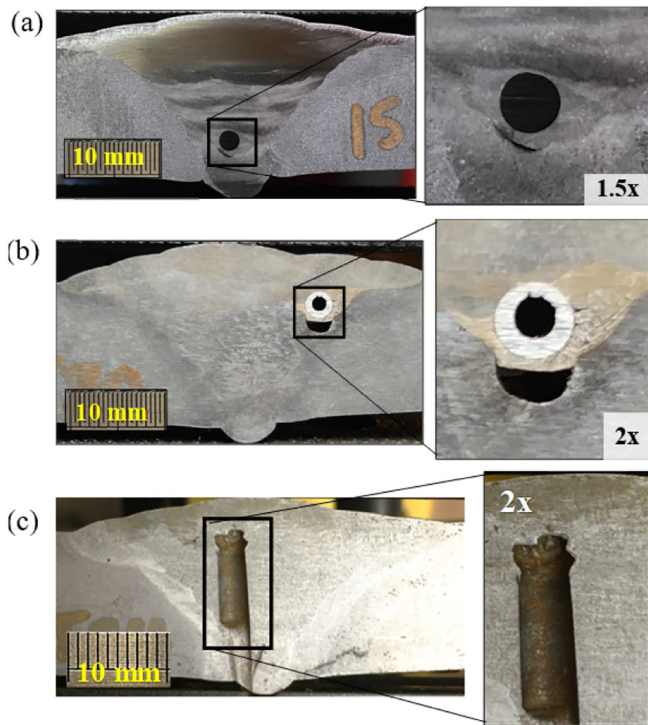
The macrograph sections of welded samples (a) T1 with a ϕ 2.4 mm tungsten rod, (b) T2 containing a tungsten tube with an inner diameter of 2 mm, and (c) T3 with a vertically drilled ϕ 3 mm hole.
